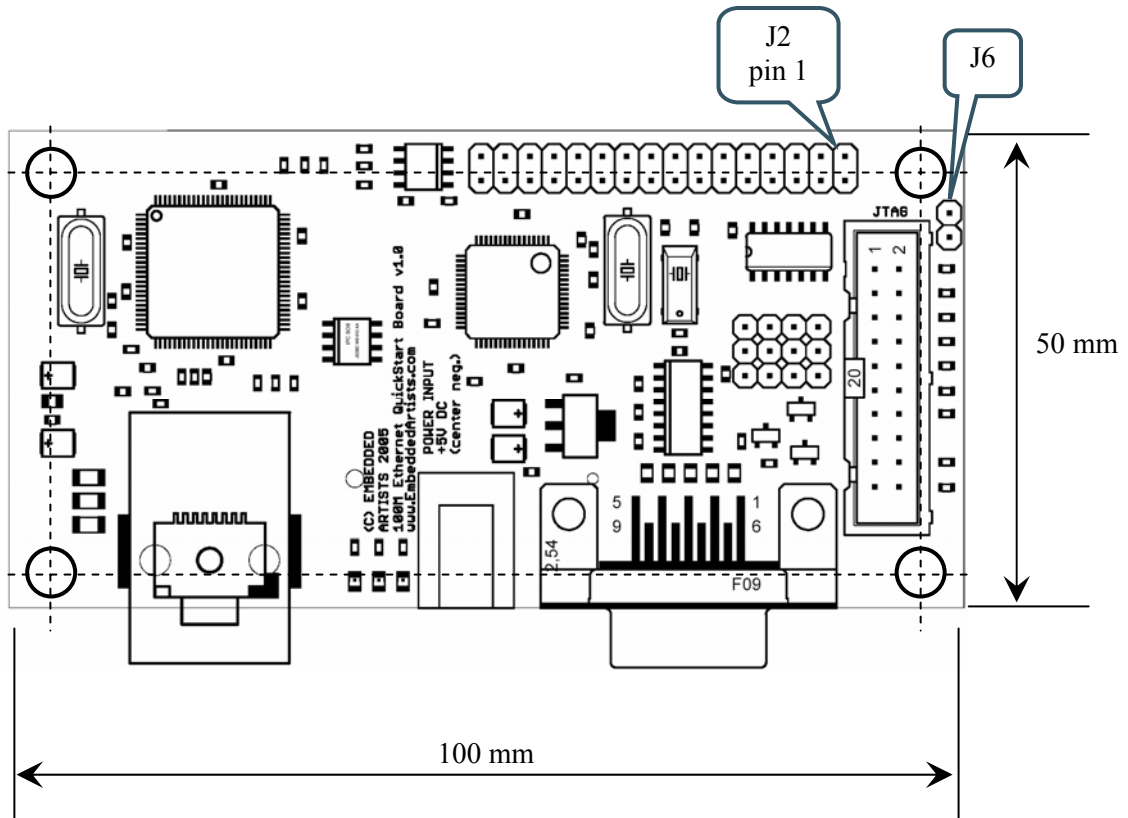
100/10M Ethernet LPC2138 QuickStart Board Mechanical Dimensions
